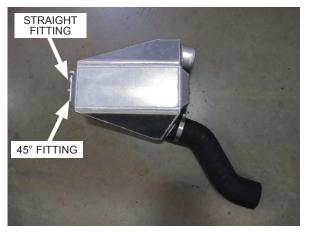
w: Install discharge sleeve 'C' to the air/water cooler as shown
